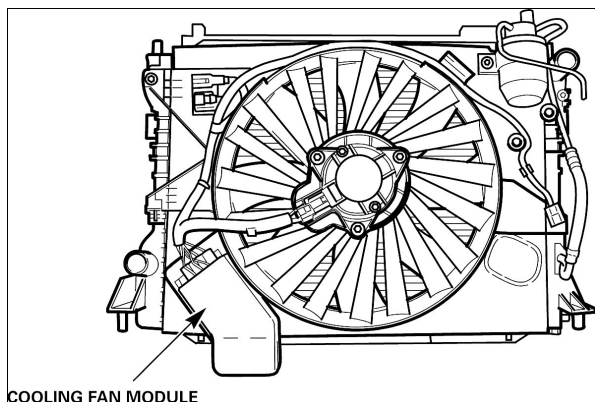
S-TYPE RADIATOR COOLING FAN ASSEMBLY
